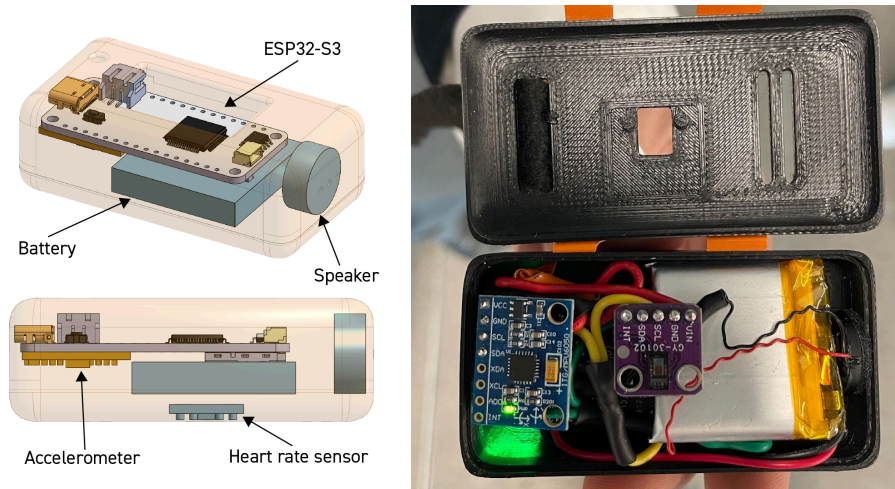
Layout of components (left), and parts assembled in enclosure (right)
